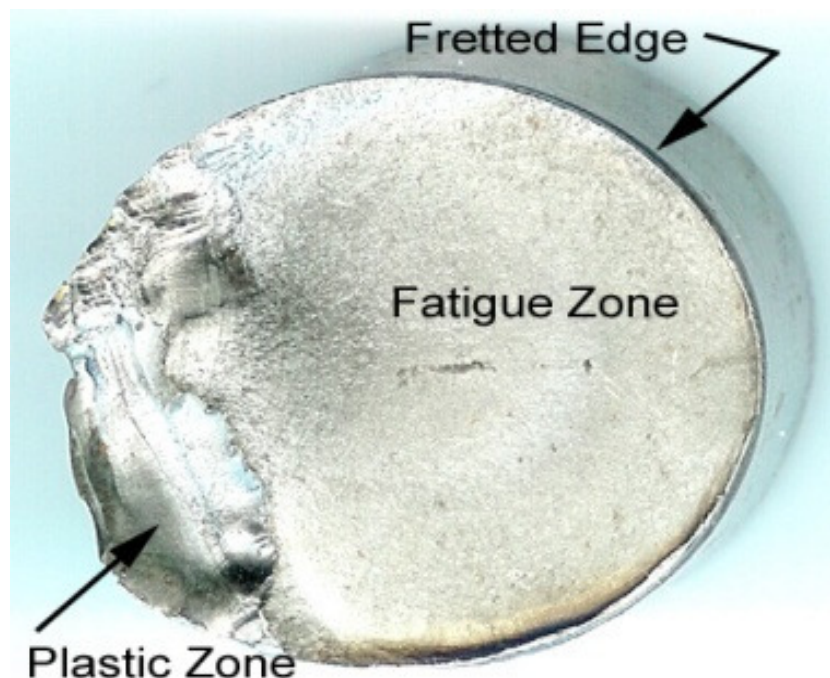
The cross-sectional view of a shaft with fatigue crack
